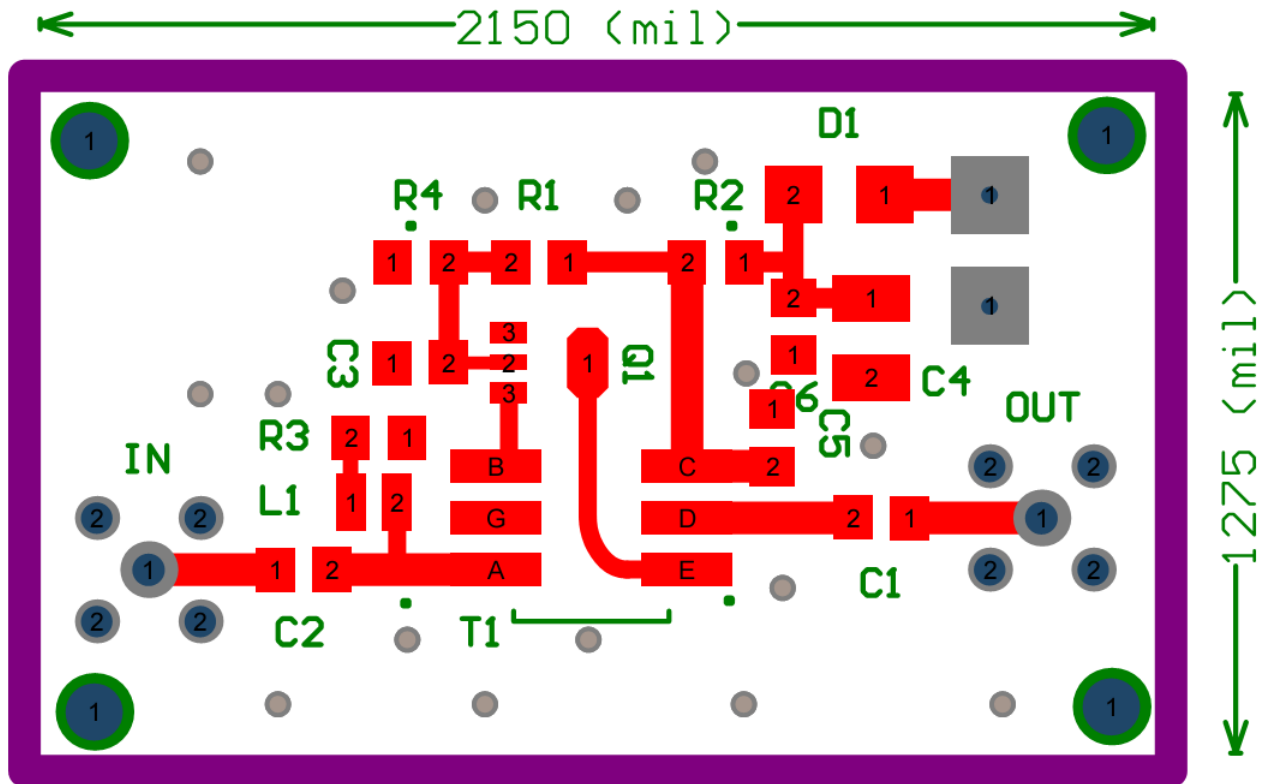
The PCB layout of the 8 dB amplifier circuit. The dimensions of the board are indicated (1 mil = 0.001 in).
